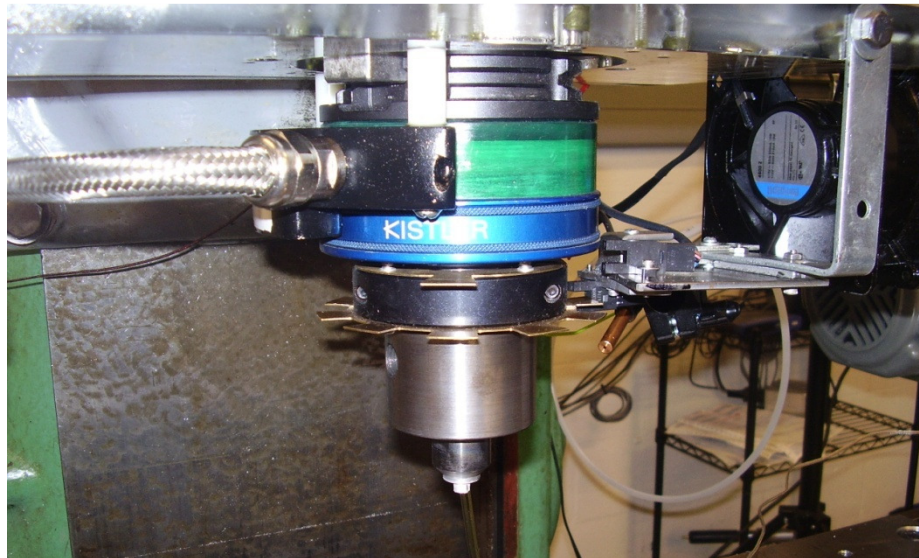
The Lower Spindle. Shows the Kistler dynamometer and optical encoder set-up.
